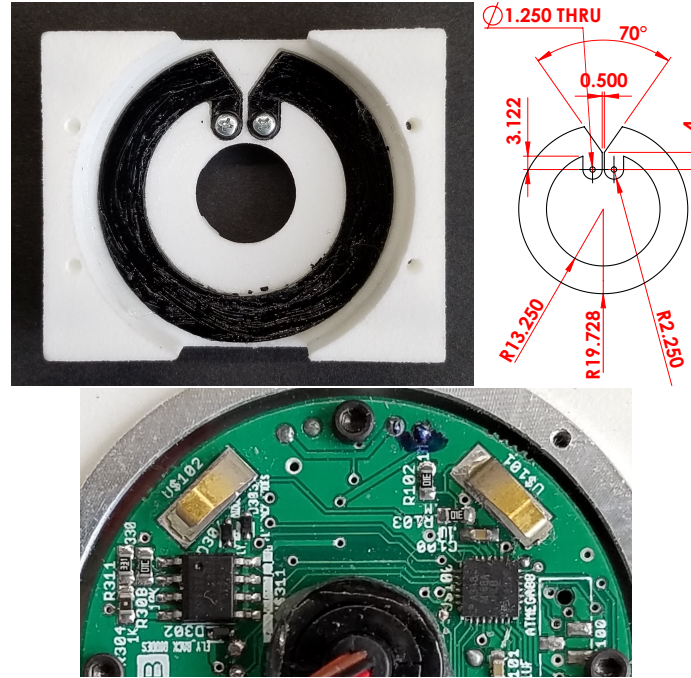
Top Left: Wheel PaintPot installed in chassis. Top Right: Drawing of wheel PaintPot with dimensions in mm. Bottom: Circuit board used with wheel PaintPots showing Harwin S1791-42 wipers mounted at a 50° angle.
